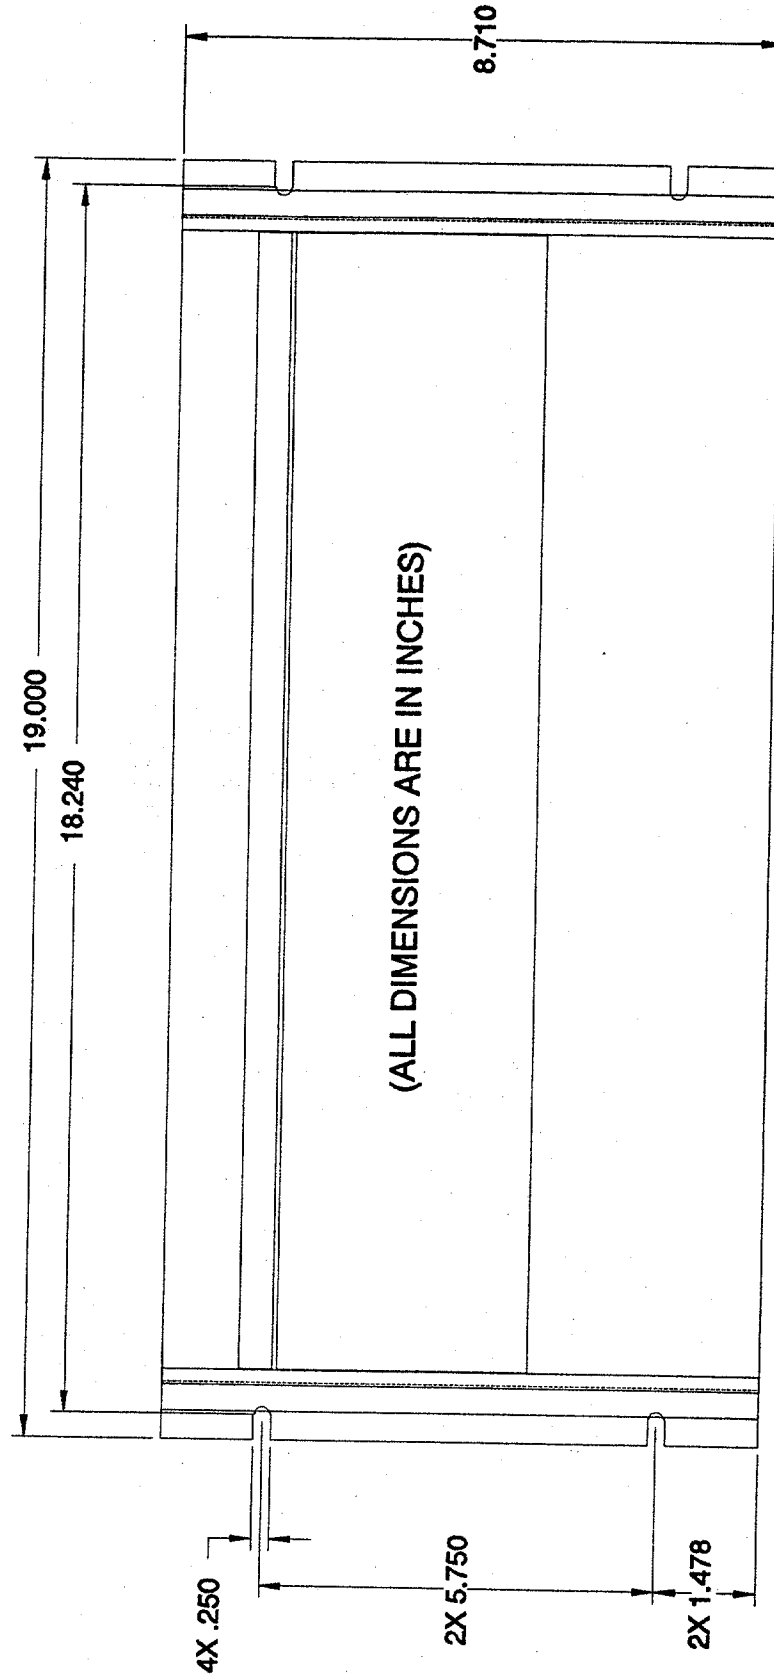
SW 5250 (Front View) Mounting Dimensions
